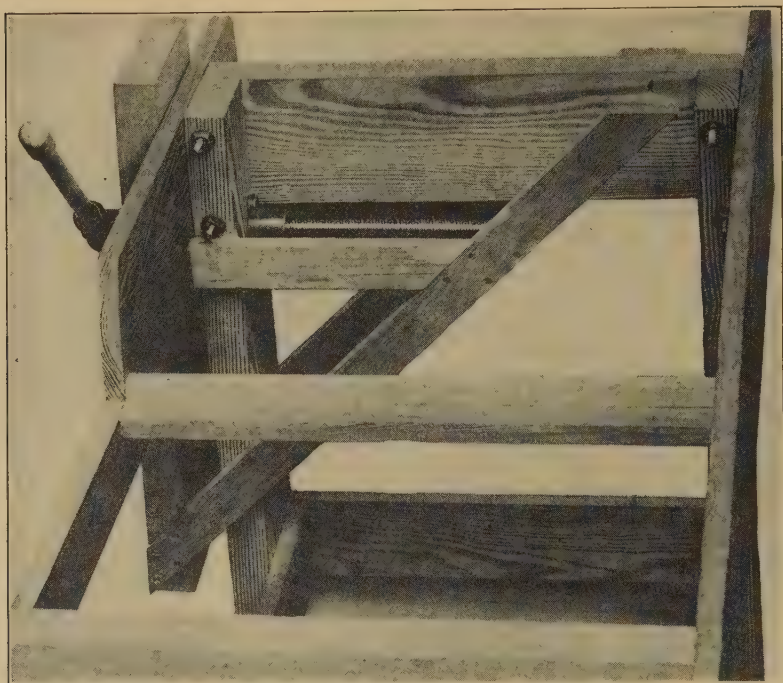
VISE AND DRAWER CONSTRUCTION ON WORK BENCH
